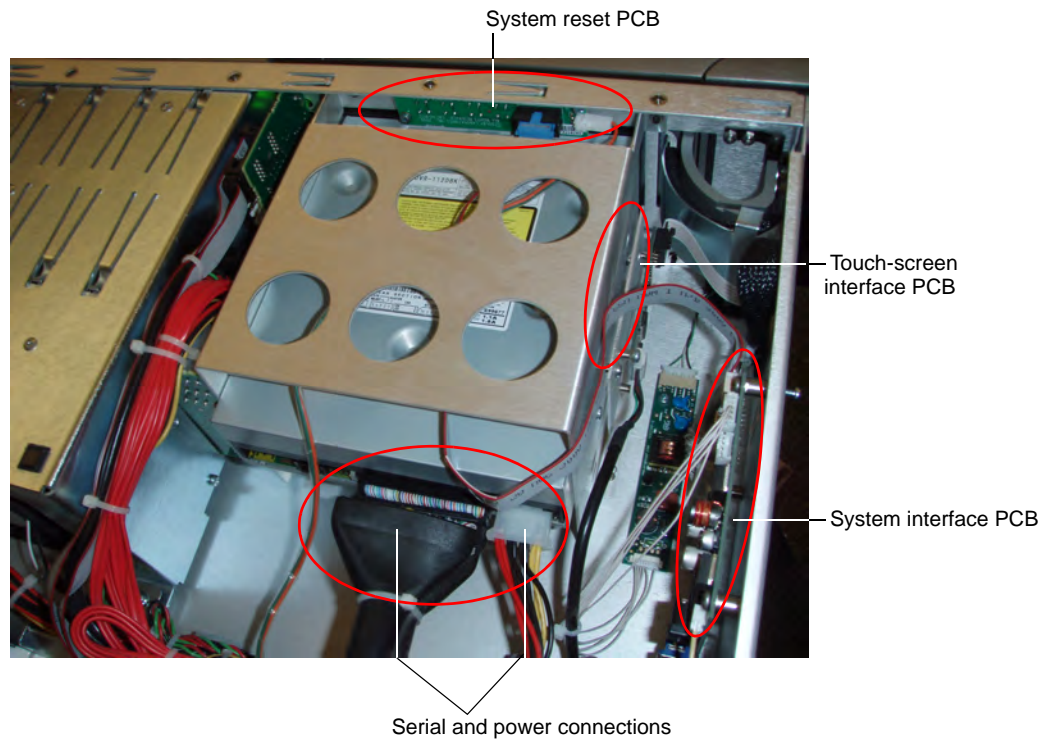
DVD Drive Housing Assembly and Adjacent Areas (Rear View)
